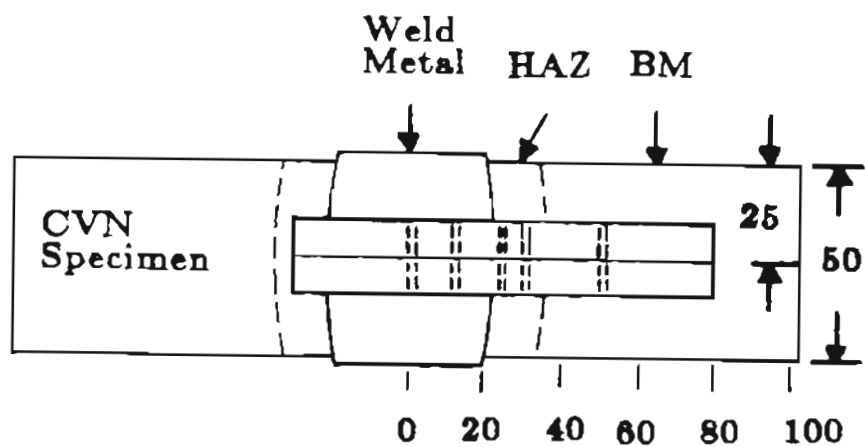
Specimen location for CVN toughness blanks taken from electroslag welds. The blanks were etched and notched in the appropriate location (dotted lines), and then machined to final dimensions. (All unit in mm).
